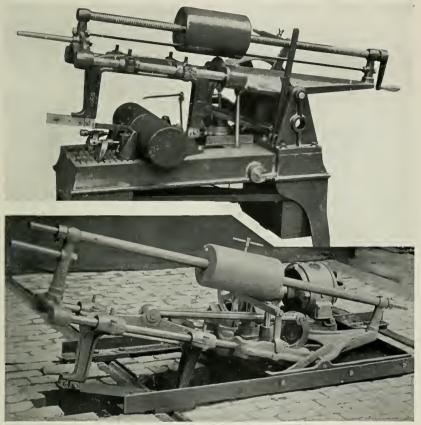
7" Multiple Saw for cutting blanks from $\frac{3}{4}$ " thick up to the capacity of the machine.
